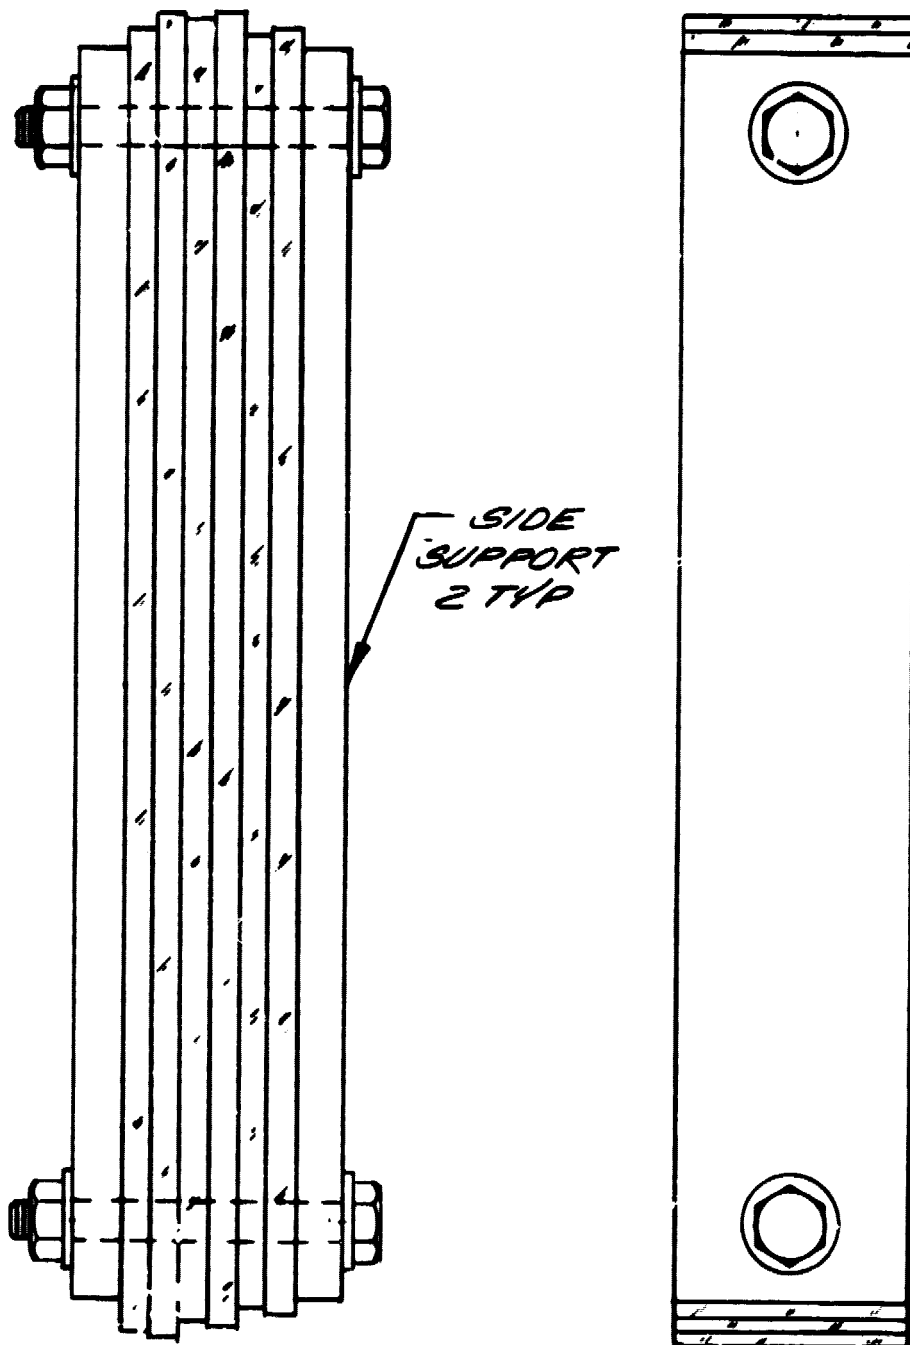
Strips Assembled with Side Supports and Screw Clamps
